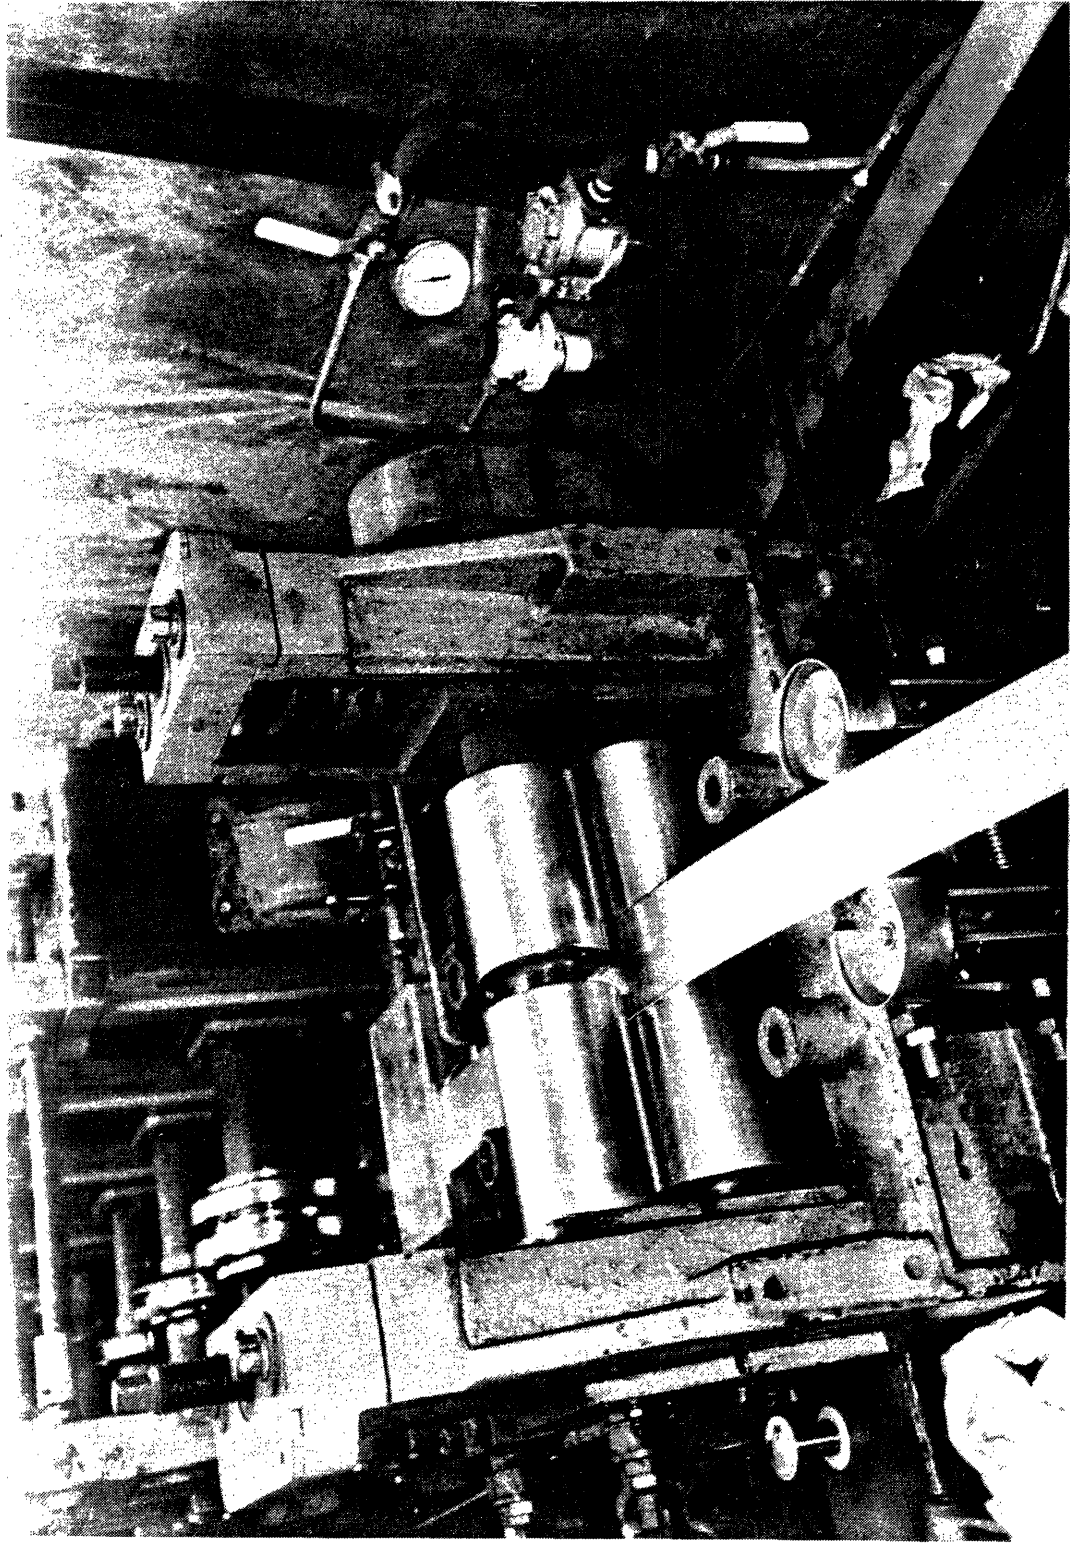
B: Airco tube mill used for production of Nb_3Sn ICCS conductor. The operation starts with a continuous sheet of 1.7 mm material which is formed around the cabled conductor, seam welded, and subsequently drawn down and squared-off.
